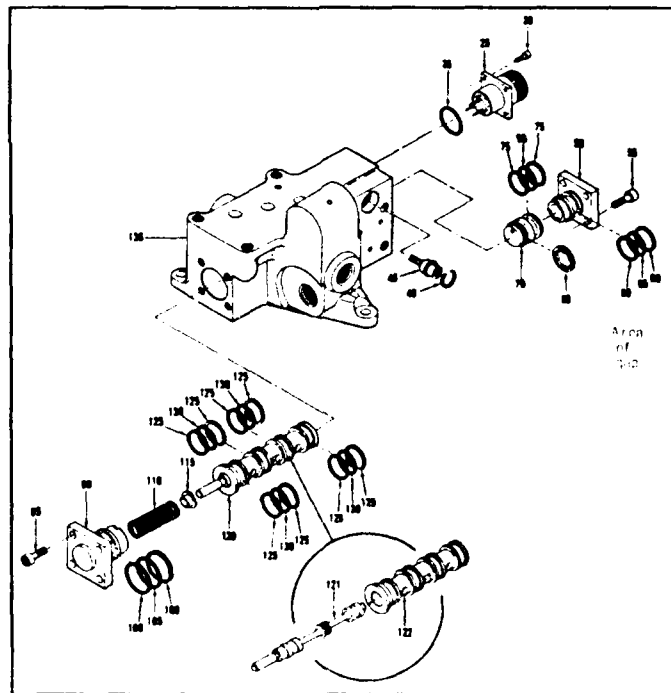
Breakout drawing of the autobrake module shutoff valve assembly.
